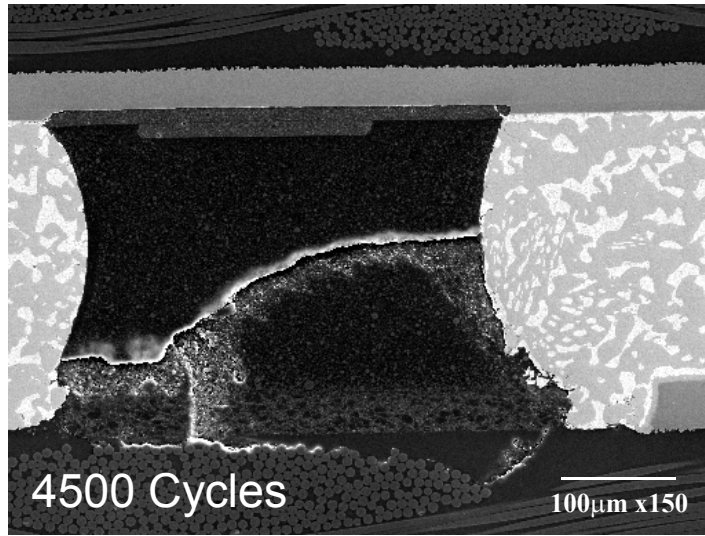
Failure Mode for Underfilled BGA Underfill Cracking with Solder Extrusion to Cause Shorting
